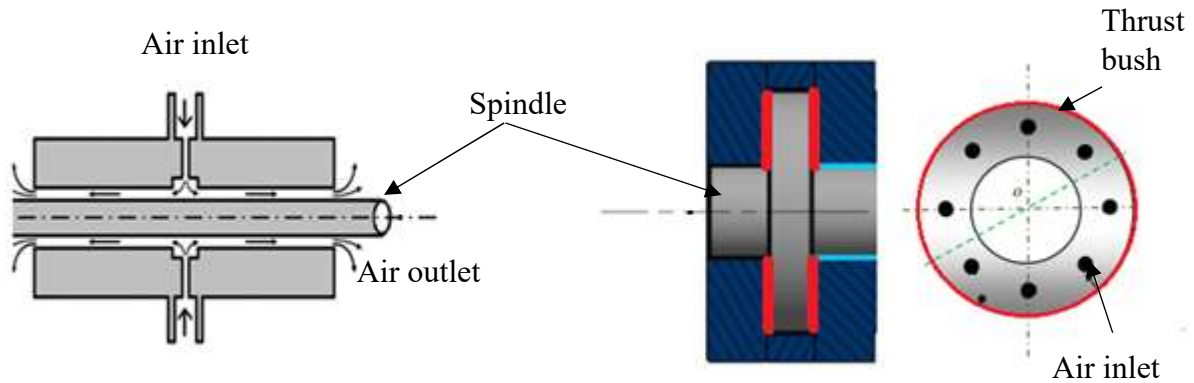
Bearing classification based on functionality (a) journal bearing, and (b) thrust bearing [1]
